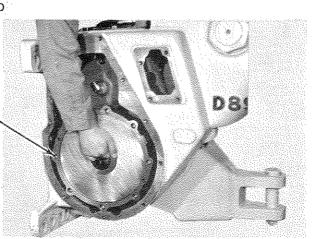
Installation of Brake Shaft Assembly (Sheet 1 of 2)
